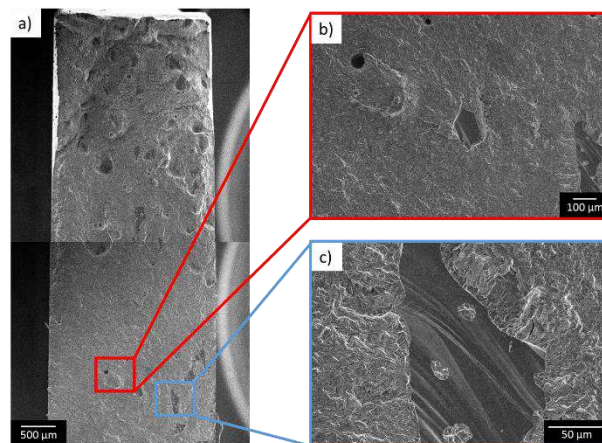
Fracture surfaces of fatigue specimen after S-HIP [16]
